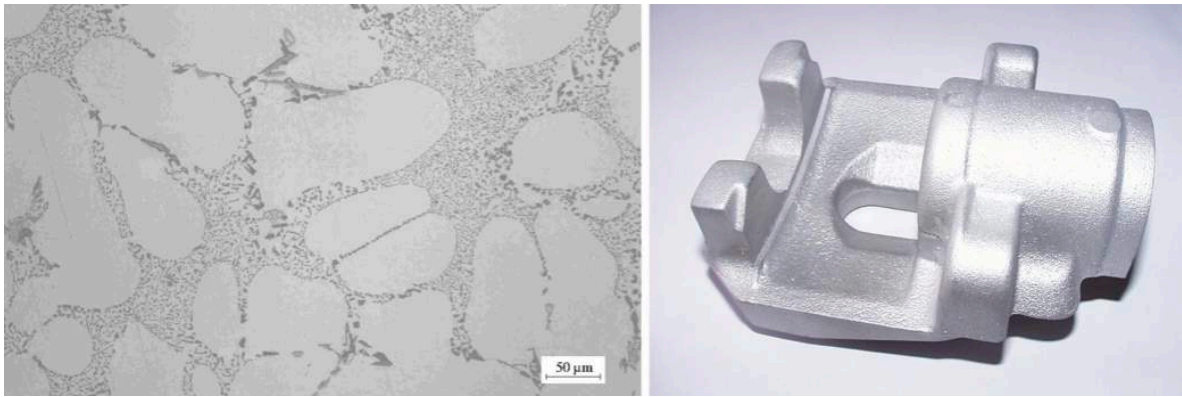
Left (Microstructure of brake caliper) – Right (Picture of brake caliper)
